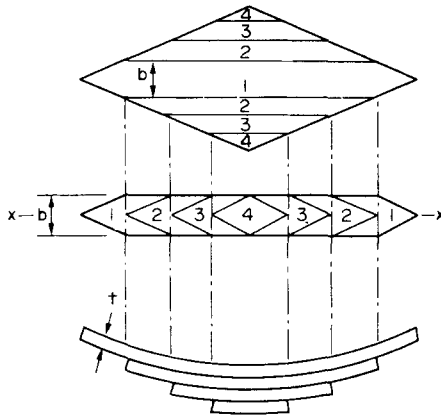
Semi-elliptic carriage spring showing initial pre-forming.
